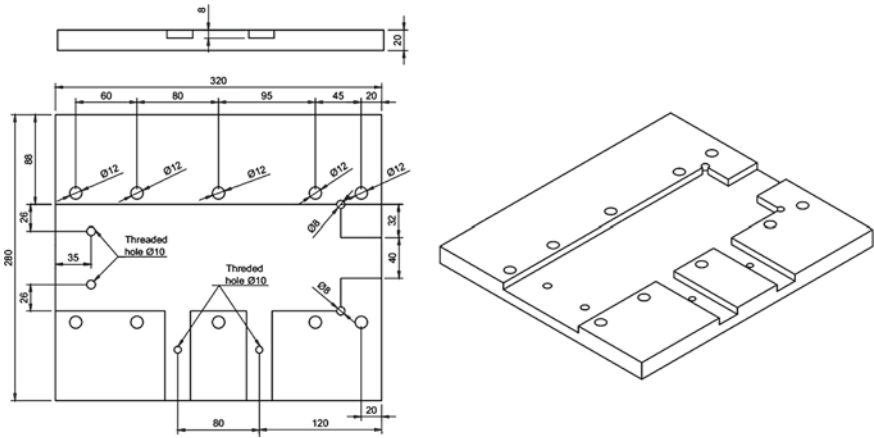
Fixture plate with recess for the accommodation of workpiece (all dimensions in mm)
